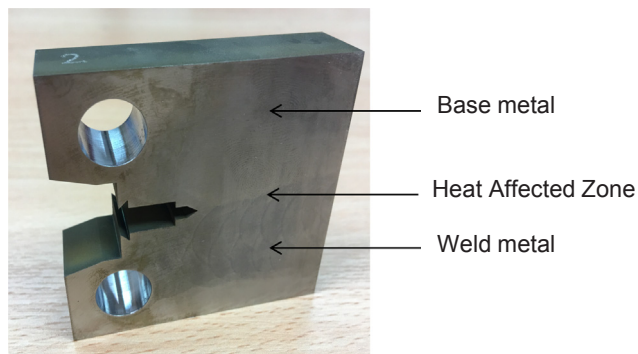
C(T) sample extracted from the welded plate after polishing and etching.
